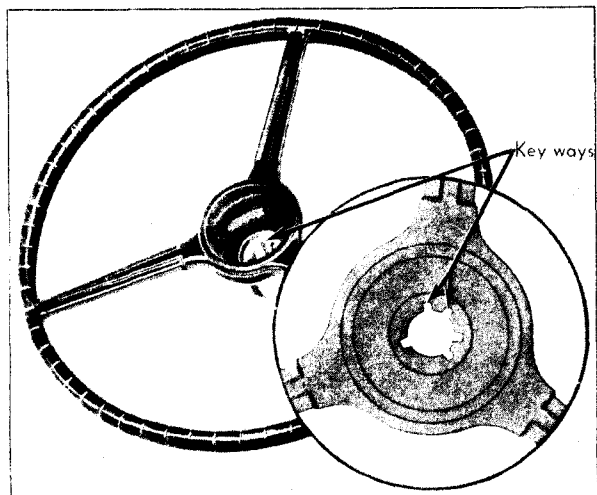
Five keyways in the hub provide for accurate alignment of the steering wheel
